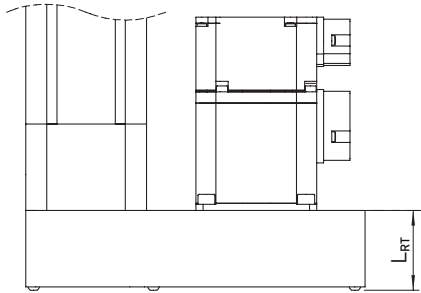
Motor connection of linear modules HM-S with belt drive
